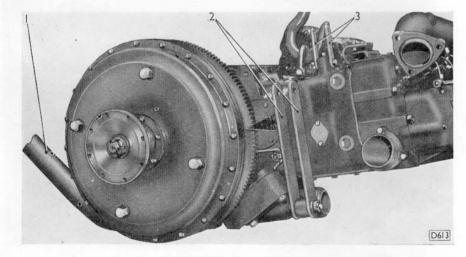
Engine fitted with torque tube and linkage prior to fitting to car.
